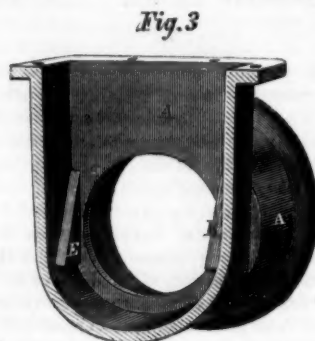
is a perspective view of the valve-box, and a partial view of the valve partly raised, with its face to the front. Fig. 2 is a view of the rear side of the valve; the valve box being partly broken away to distinctly show the arrangement and connection of the parts of the device. Fig. 3 is a view of the portion of the valve box at the back side of the valve. Such portions of the device as are shown in each of the engravings are indicated by the same letters on each.
